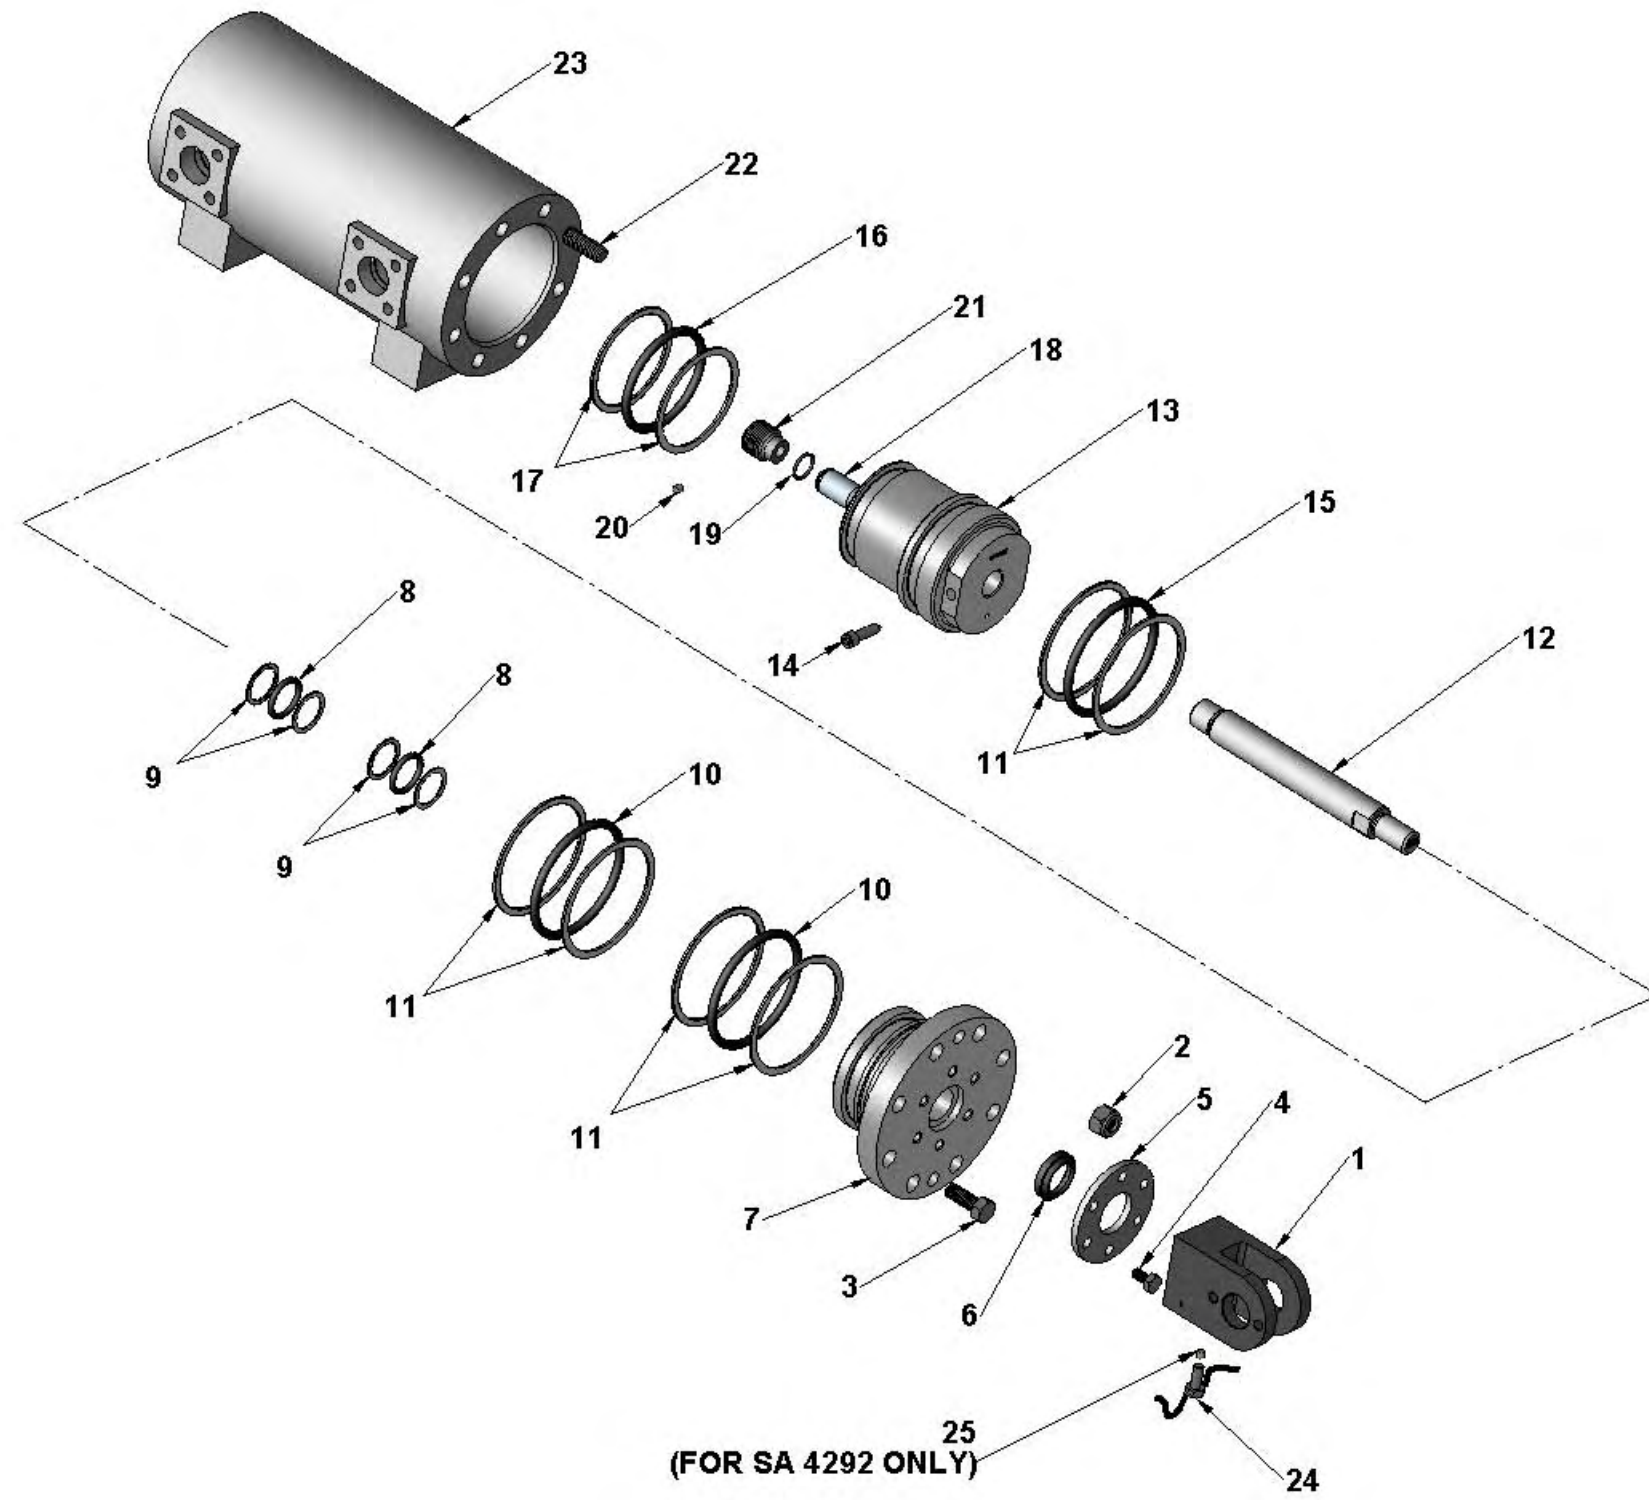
Fairing Lock Hydraulic Cylinder (SSN 721 and Later)
